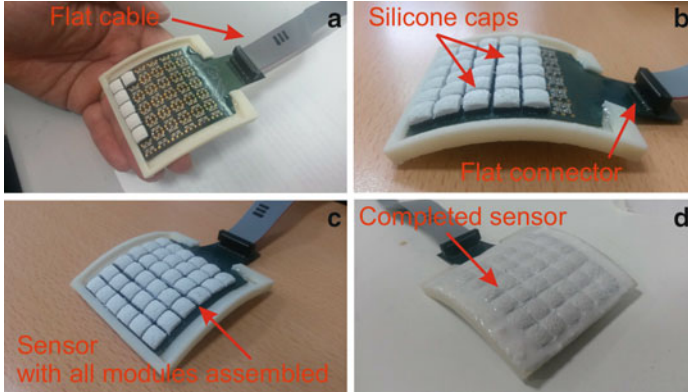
Conformable sensor patch during assembly phases: (a) perspective view, (b) side view, (c) perspective view of the sensor prototype, (d) completed sensor prototype after second silicone molding.
